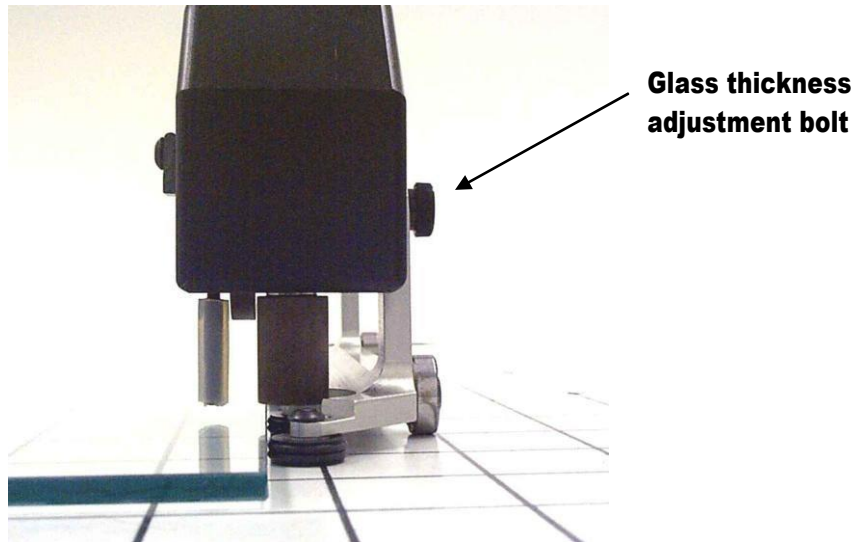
Pivot pin should be adjusted to 1/16" to 1/8" above glass surface.
